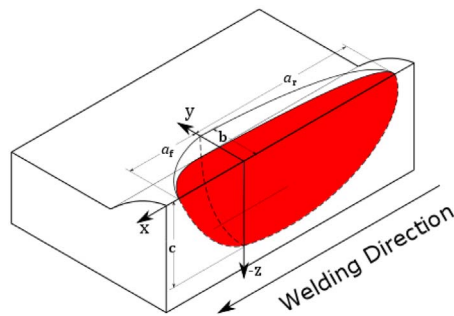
Isometric view of the heat source which shows how it was applied to the weld bead profile.
